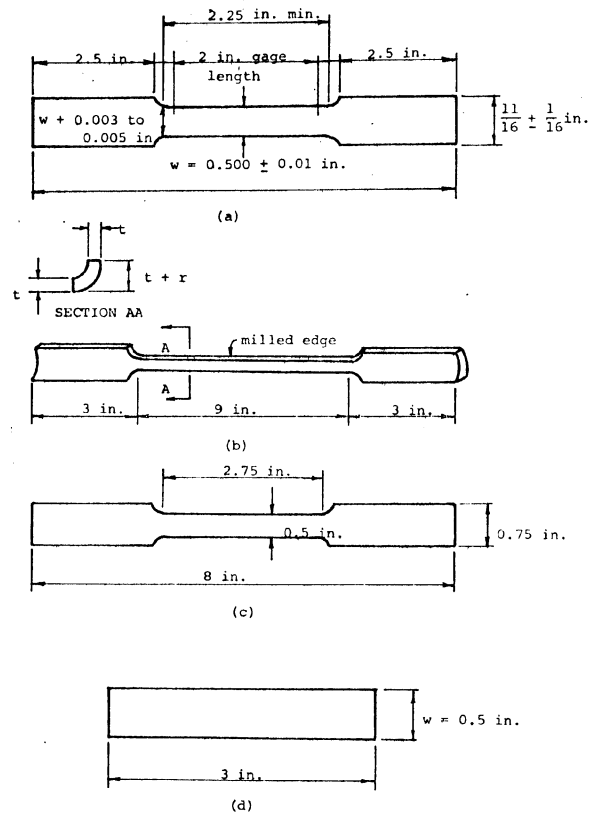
TYPICAL SPECIMENS. (a) STANDARD ASTM FLAT STEEL SPECIMEN. (b) TENSILE CORNER SPECIMEN WITH INSIDE RADIUS  $a$  NOT LARGER THAN 0.5 INCH. (c) TENSILE CORNER SPECIMEN WITH INSIDE RADIUS  $a$  LARGER THAN 0.5 INCH. (d) COMPRESSIVE FLAT SPECIMEN.
